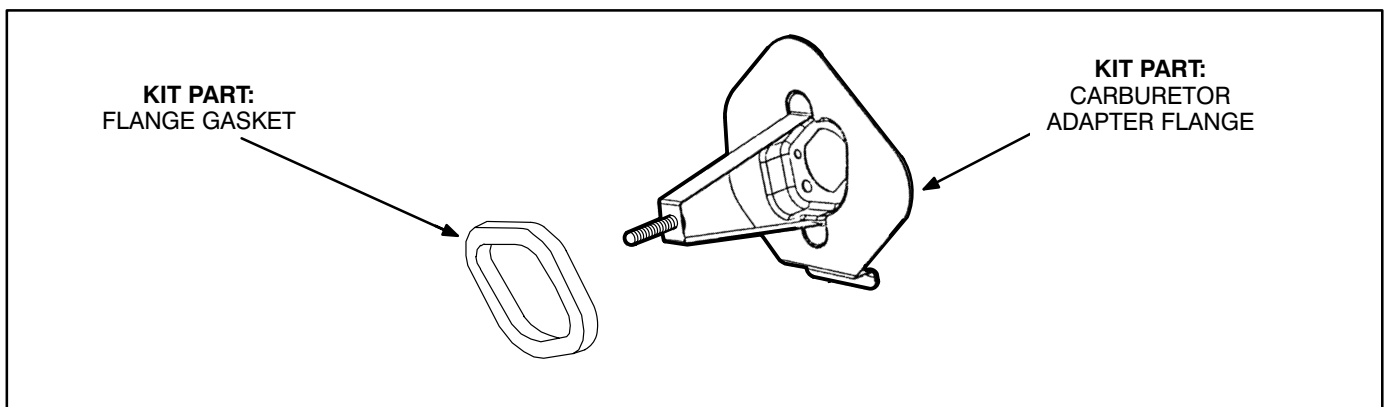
CARBURETOR ADAPTER ASSEMBLY (KIT 146-0743 only)
